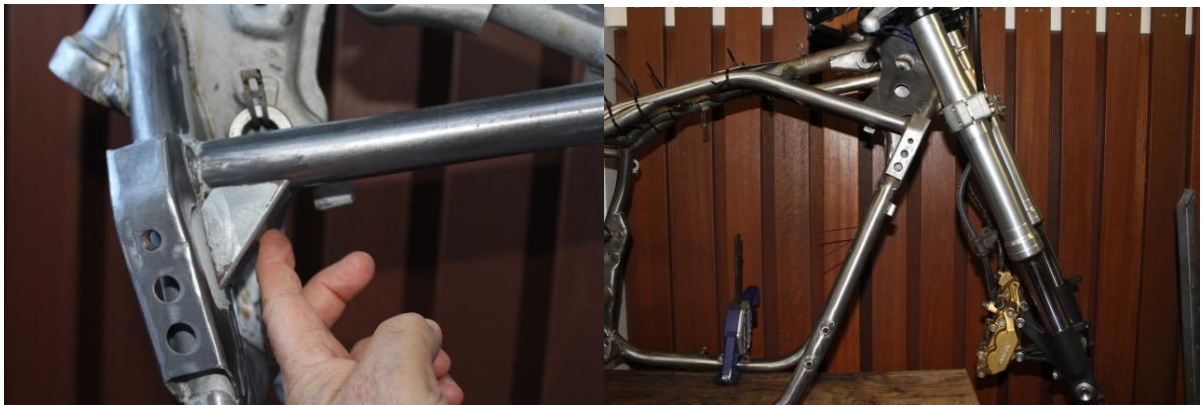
Gusseting under the the main tube in neck area. Plates to be welded around same area. Photo #4 - Plates to be welded in rear of top Main-frame tubes. Gusseting in Rear Main tube area.
